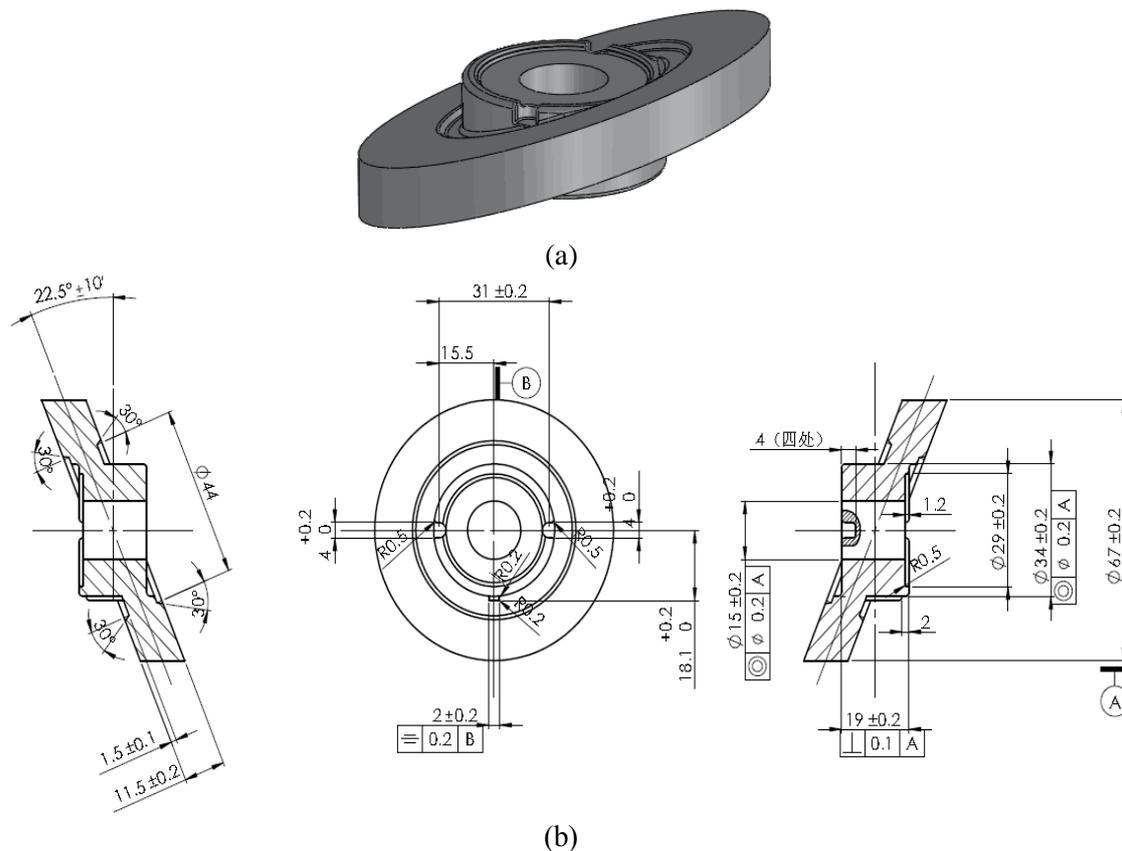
Forging and the geometries of the swash plate. (a) Forging of the swash plate and (b) The geometry of the swash plate.
